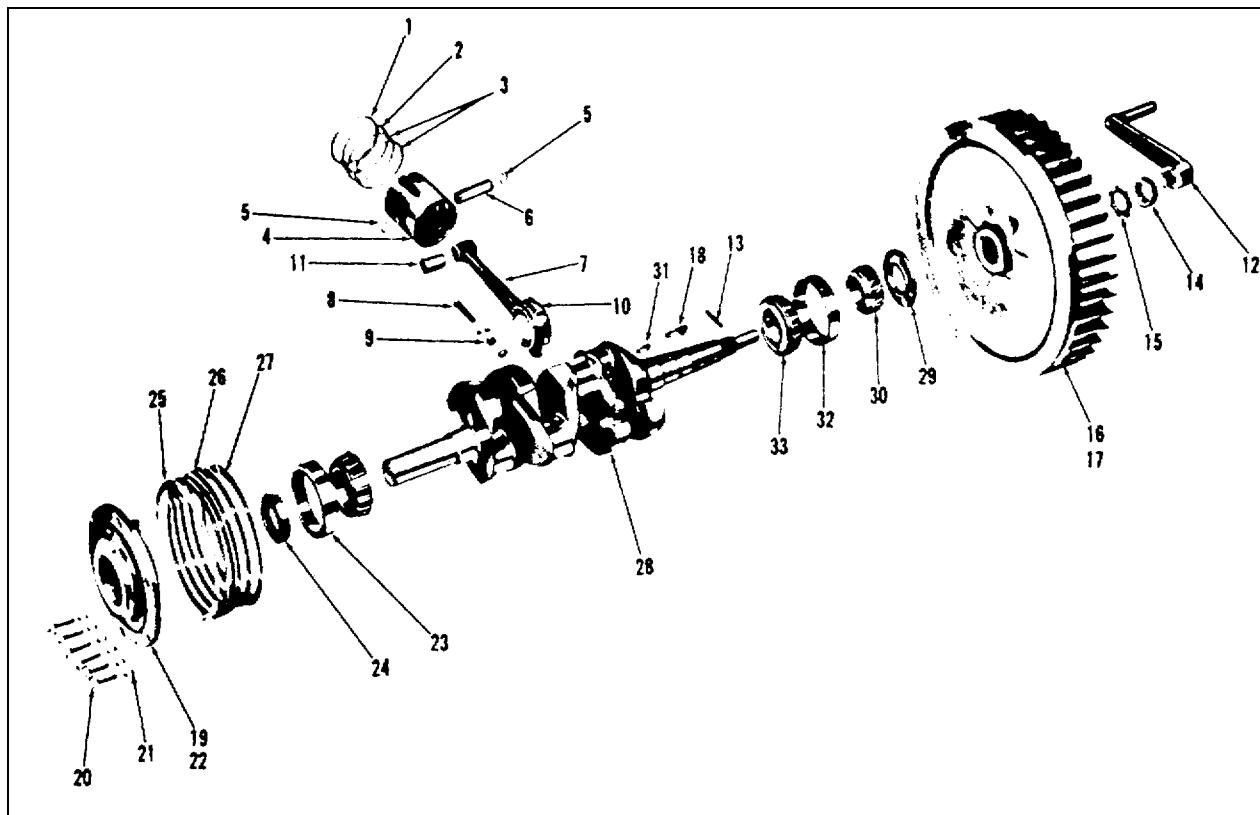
Crankshaft, Piston, and Connecting Rod Group
